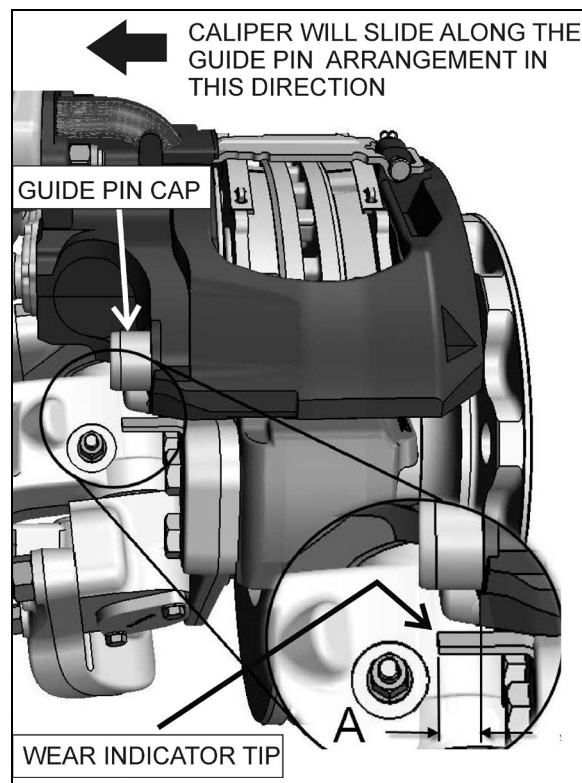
PAD WEAR CHECK FRONT AND TAG AXLE
